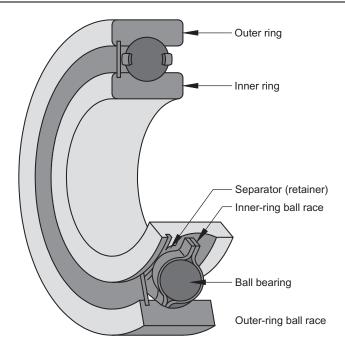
Schematic diagram of a single-row ball bearing.
